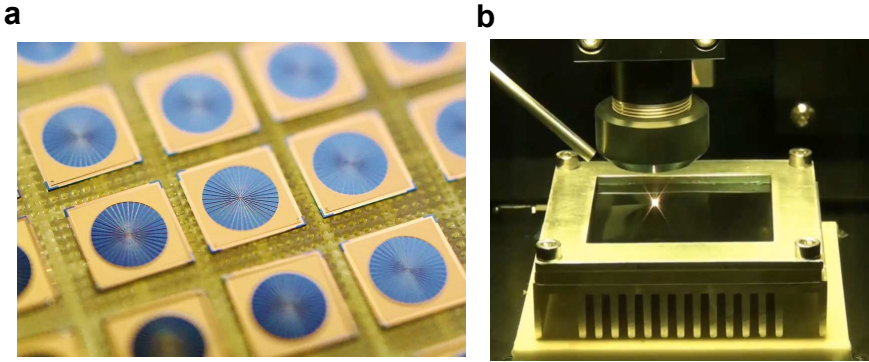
(a) A 3-millimeter-wide PCSELS on a wafer. (b) 50-watt PCSEL cutting steel (reproduced from [5]).
